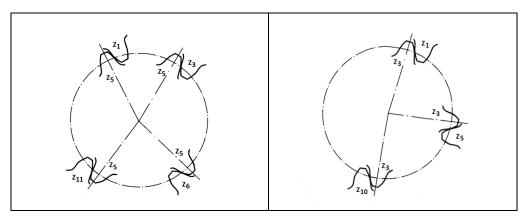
Teeth engagement cycles in individual gearings: PZA gearing and PZB gearing
